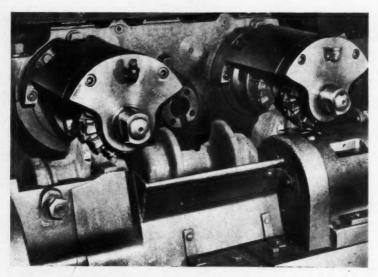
With this crankshaft milling set-up the throw-away tips are indexed while the cutters are mounted on the machine. In the first year of operation, savings exceeded the initial cost of the cutters
